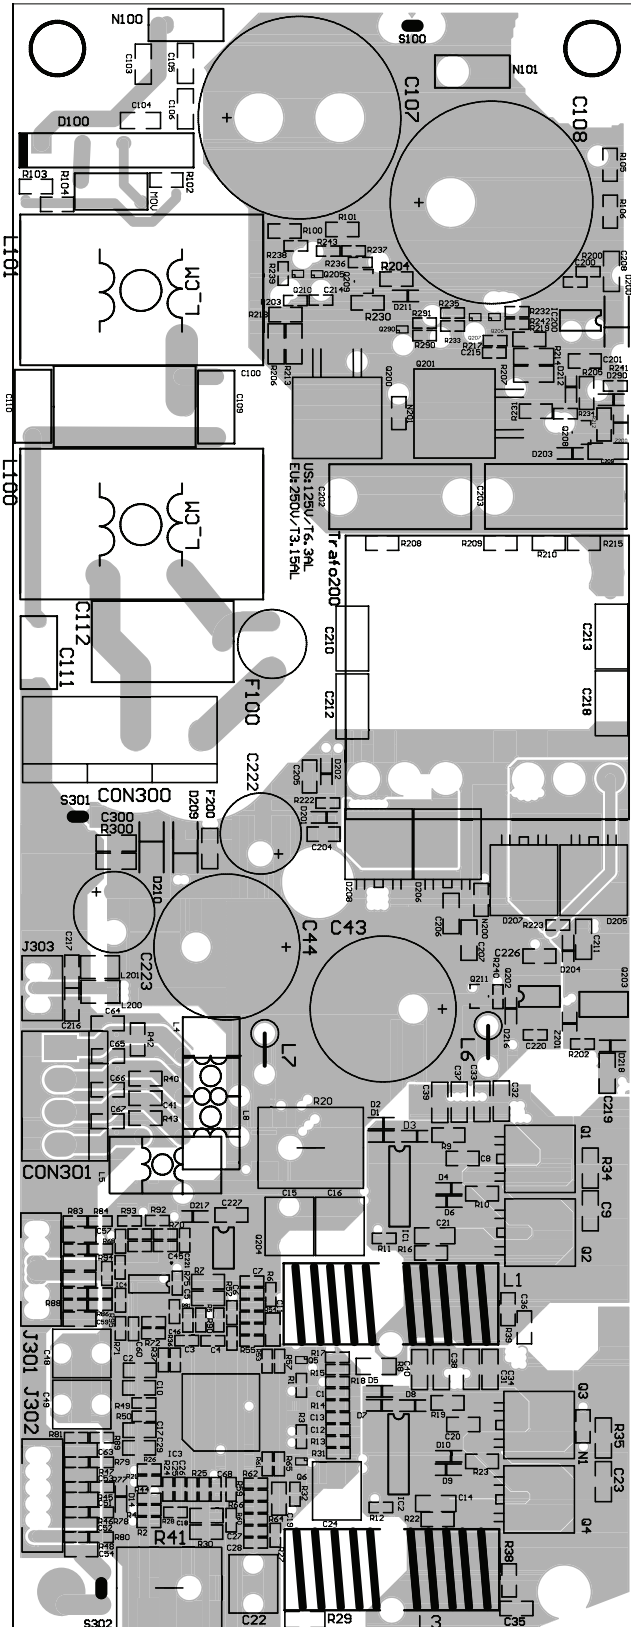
Amplifier/SMPS PCB Internal Etch Layer 2 Layout
